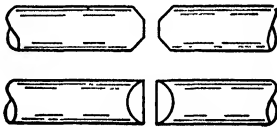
A round shaft prepared for butt welding.
